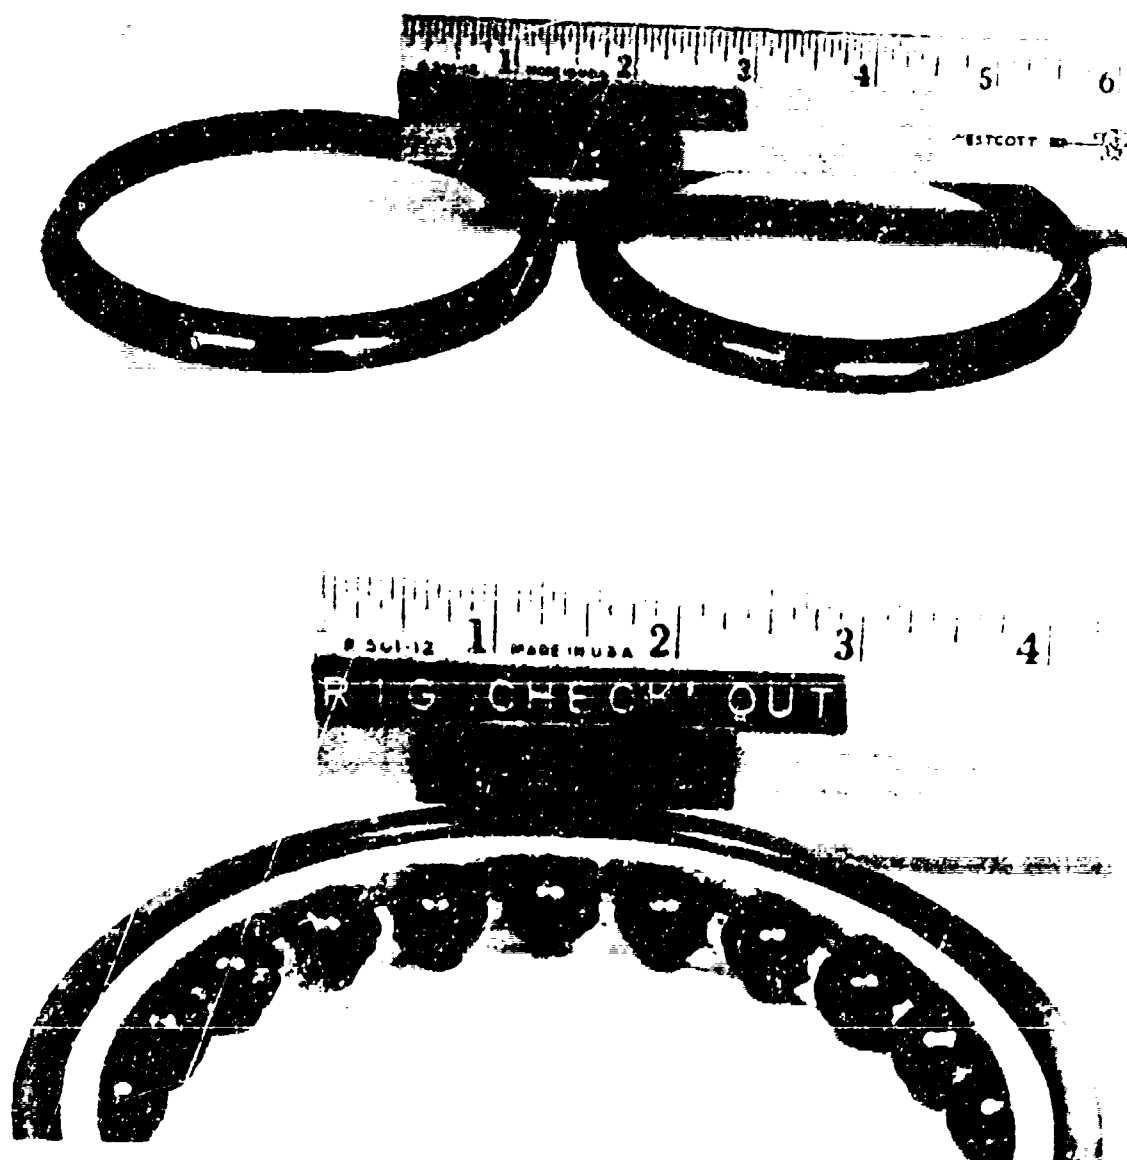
Build No. 2 Bearing Failure; Insufficient Pocket Clearance.
